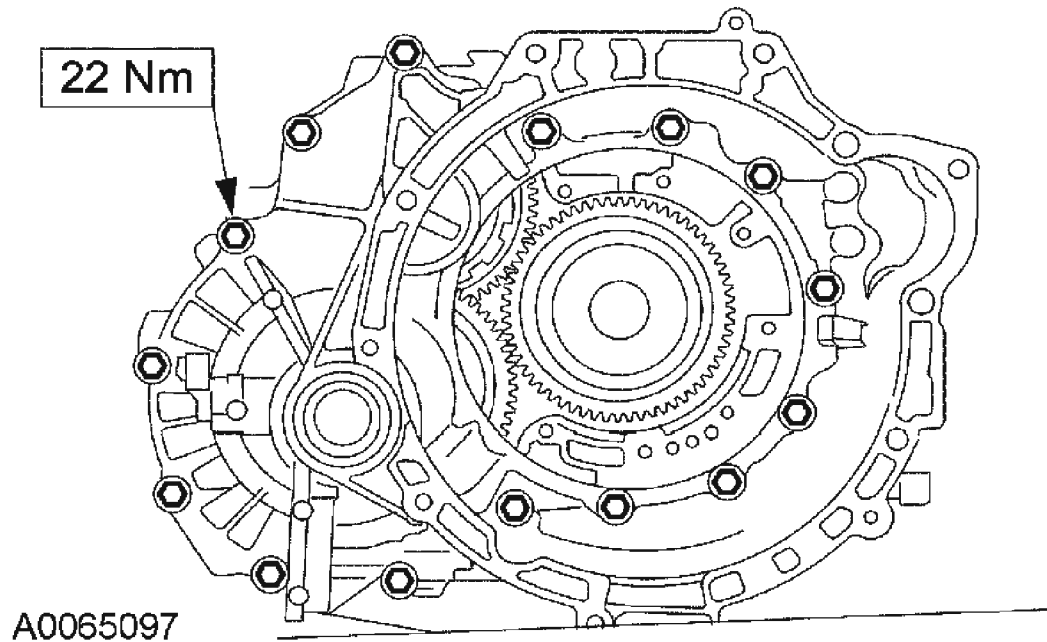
Positioning Converter Housing On Transaxle Case And Installing Bolts
